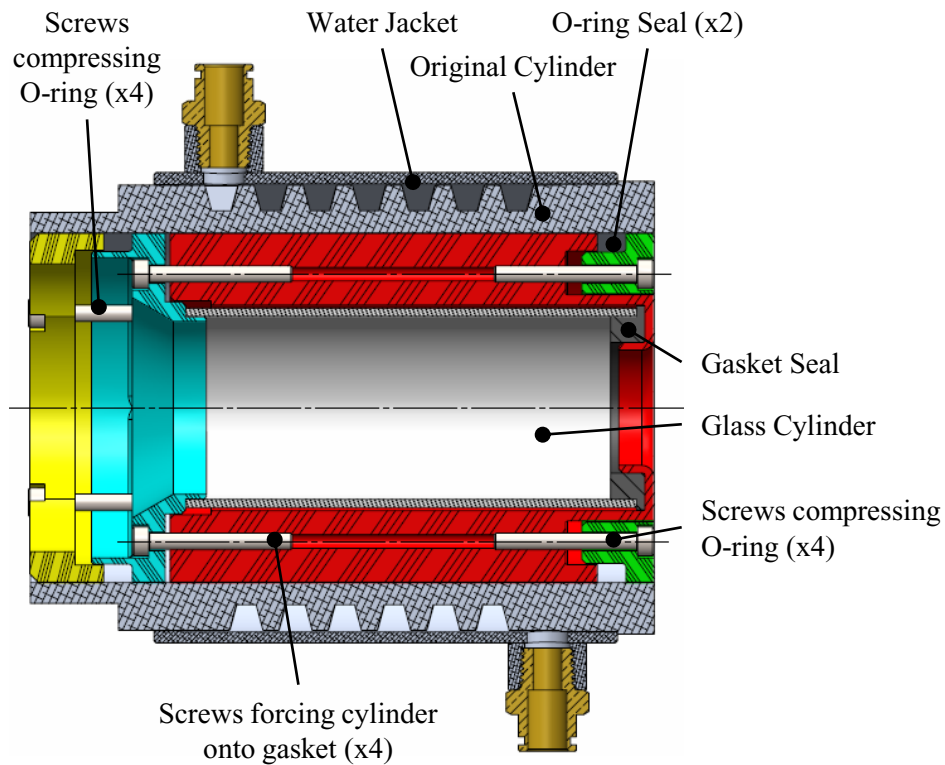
Section view of the precision glass cylinder and mounting components.
